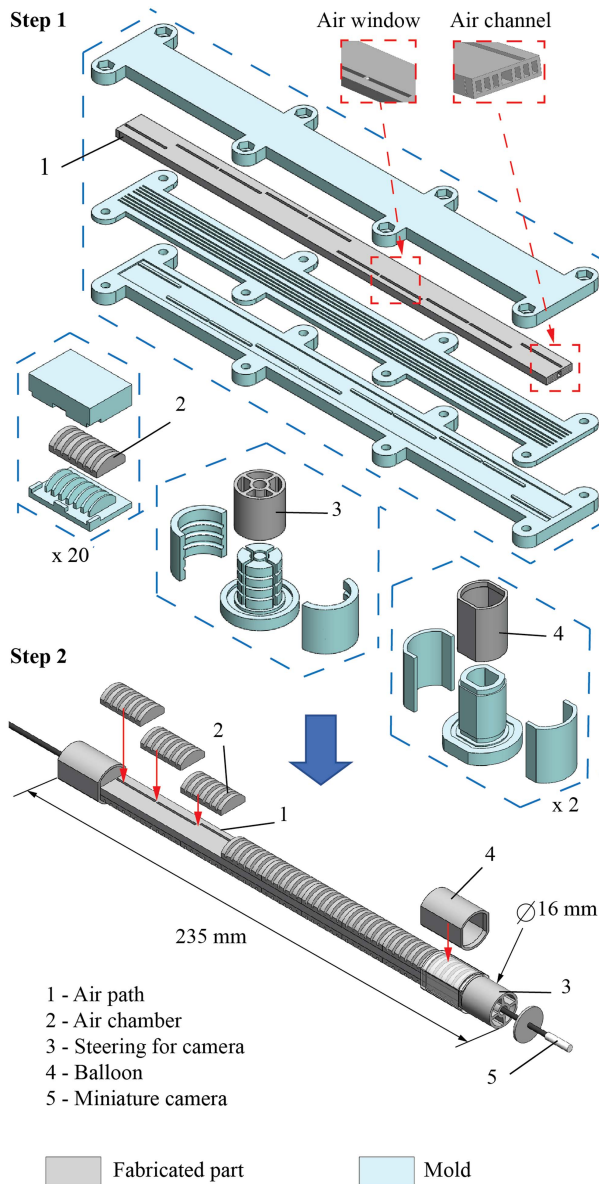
Design and fabrication process of the self-propelled soft robot. All robot parts (except the miniature camera) were made by molding technique.
